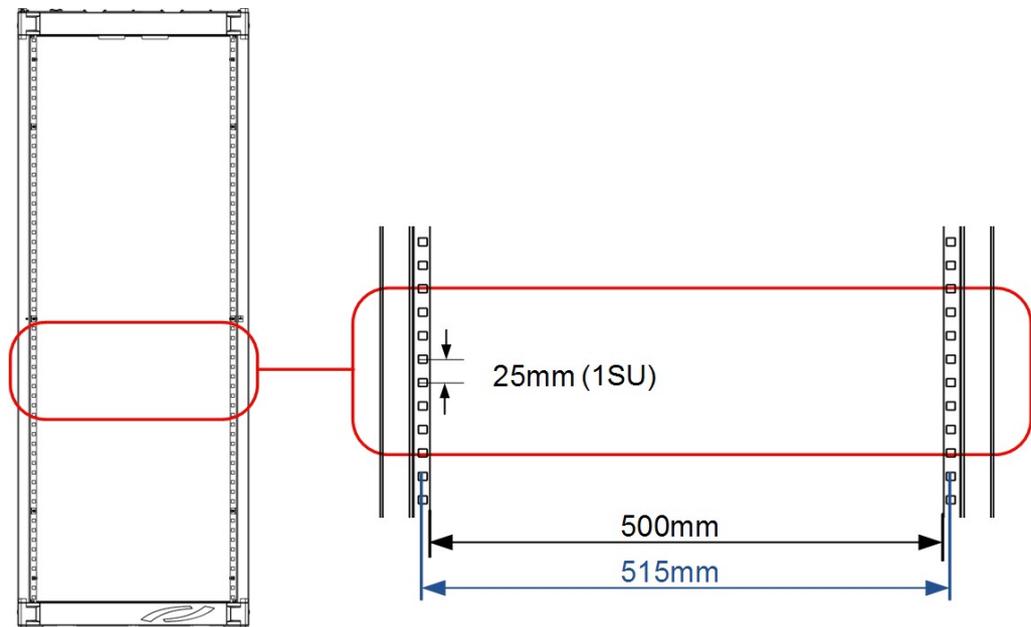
Detailed Dimensions of the 21-inch Cabinet
